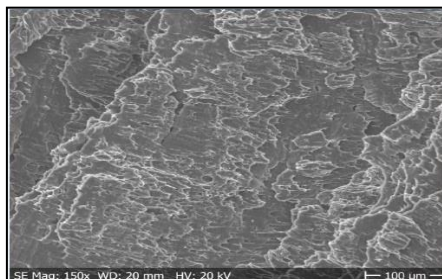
The ductile fracture surface of the rheocasting specimen.
